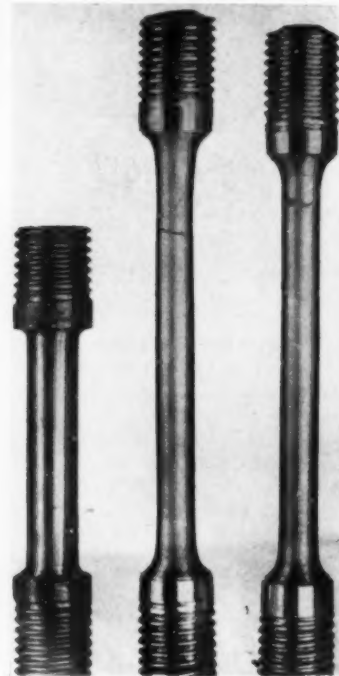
Tensile tests on core material (Left—as machined) showing small amount of "necking" at the fracture.
